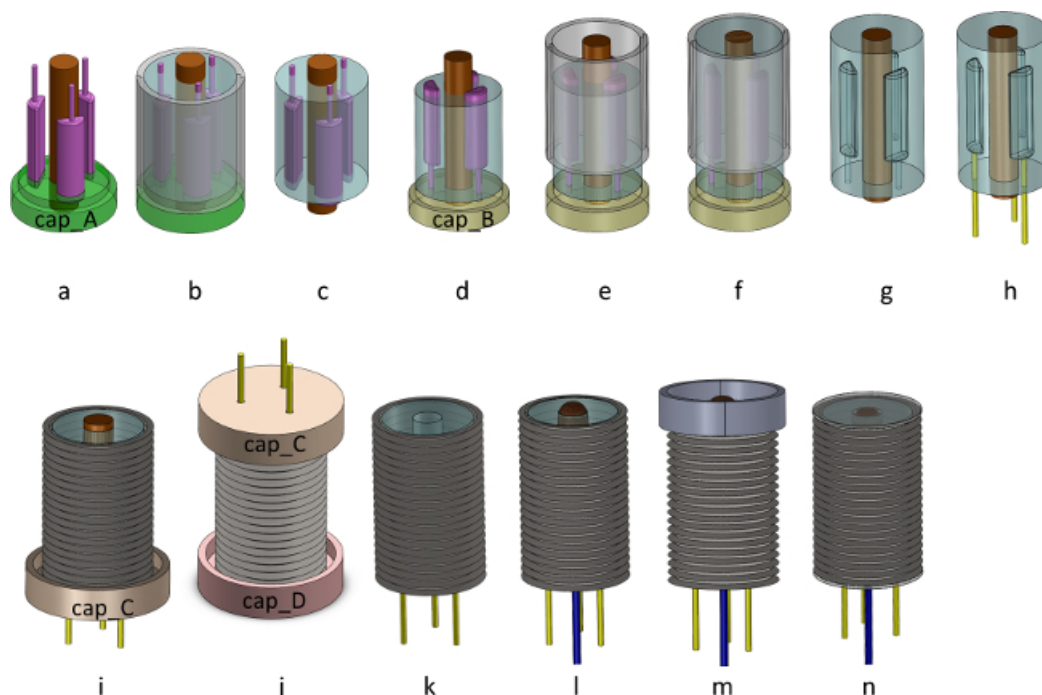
CAD of the fabrication phases. Insertion of the chambers and the stiffening cylinder into cap_A (a), first silicone casting (b), removal of shells and cap_C (c), introduction of cap_B (d), reposition of the shells (e), second silicone casting (f), removal of shells, cap_B and chambers (g), insertion of the tubes (h), insertion of cap_C and sheath for its fixing on the bottom side (i), insertion of cap_D and sheath for its fixing on the top side (j), removal of cap_D and stiffening cylinder (k), insertion of the granular jamming membrane (l), closing of the semi-rings around the module (m), final module (n).
